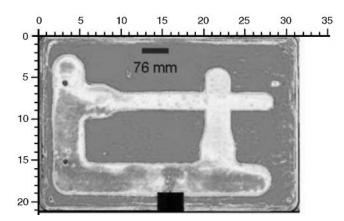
Ultrasonic inspection image for typical two-sheet SPF/DB component
